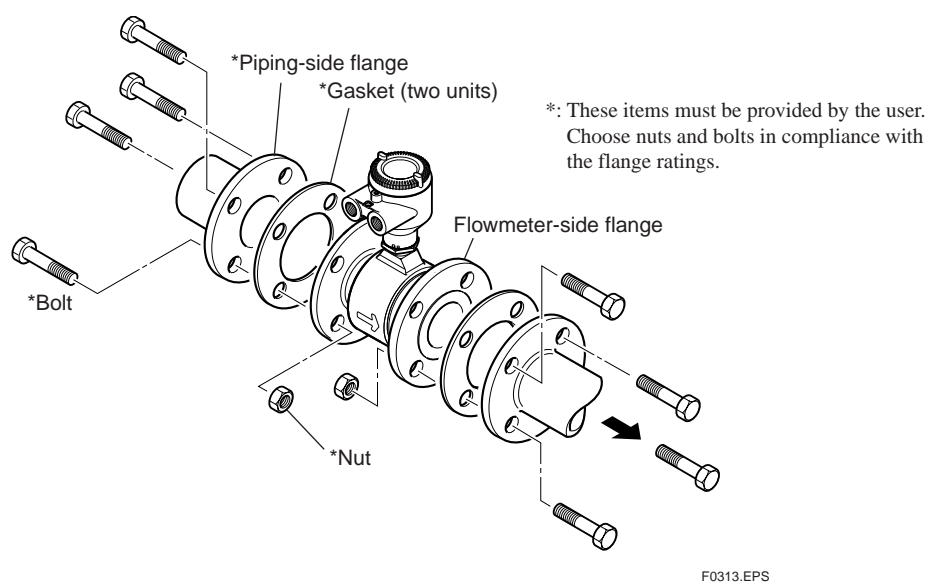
Mounting Procedure for Flange Style (size: 15 mm (0.5 in.) to 1000 mm (40 in.))
